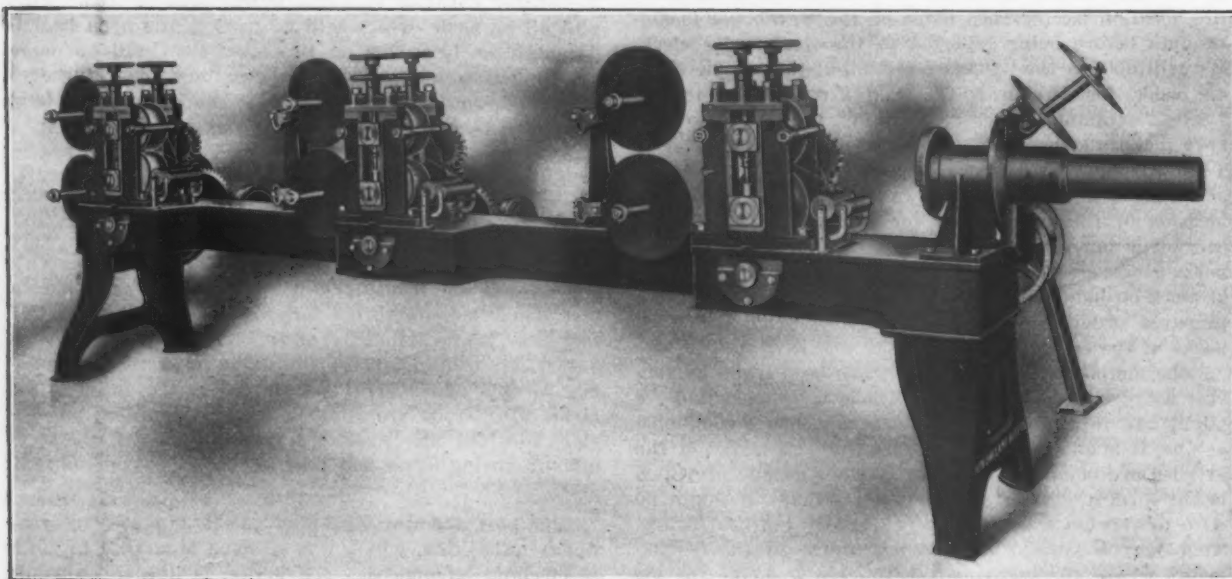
A Three-Head Rubber Covering Machine for Insulating Wires and Cables, Built by the New England Butt Company, Providence, R. I.
